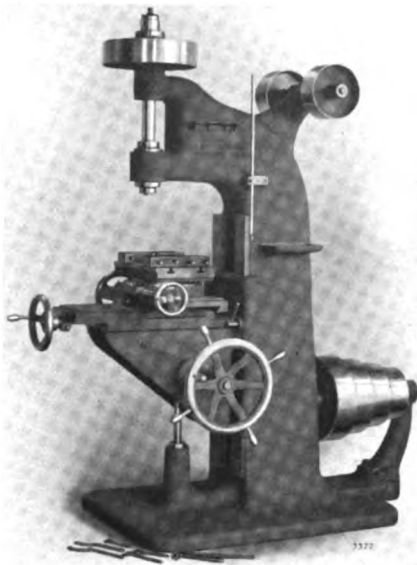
Pratt & Whitney No. 2 Die Sinking Machine
